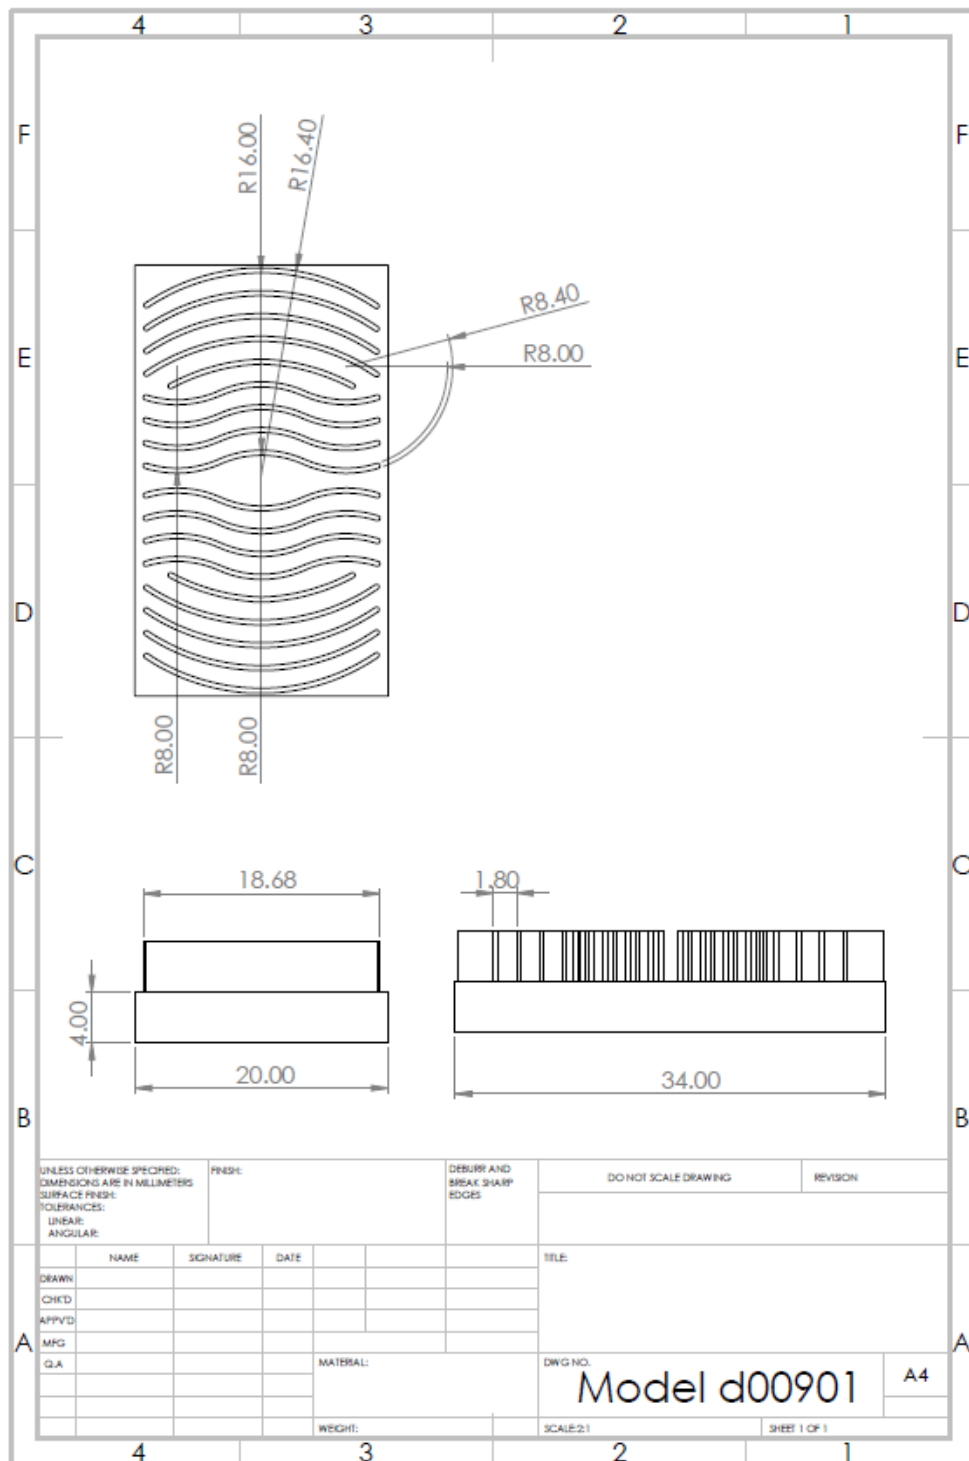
Dimensions of the 3D CAD Model Pattern d00901.
